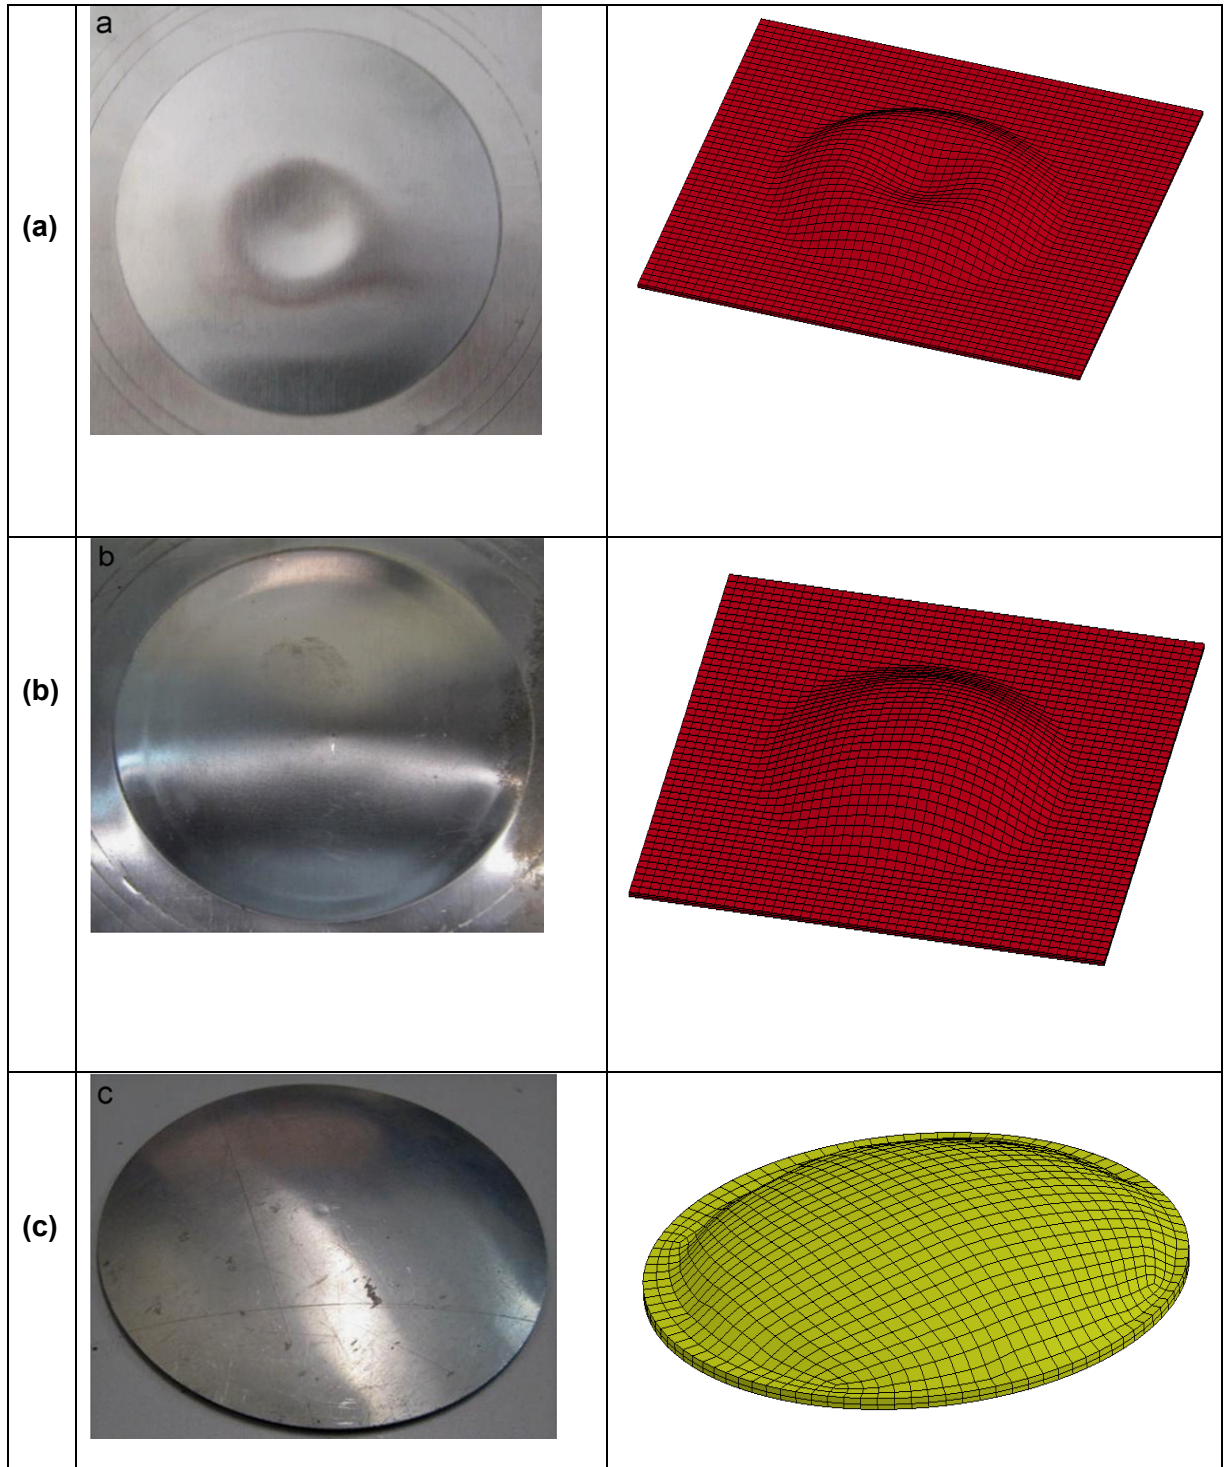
Experimental [10] and simulation parts with and without driver sheet at  $C=1152\mu F/V=1.5kV$ : (a) Without driver sheet (b) With Al driver (c) Formed driver sheet.
